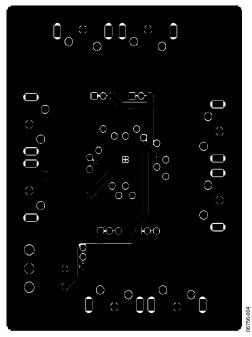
Solder Side PCB Drawing (Layer2) Component Side View
